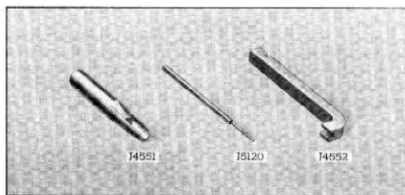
Rochester Carburetor Tools—Kit J-5127
